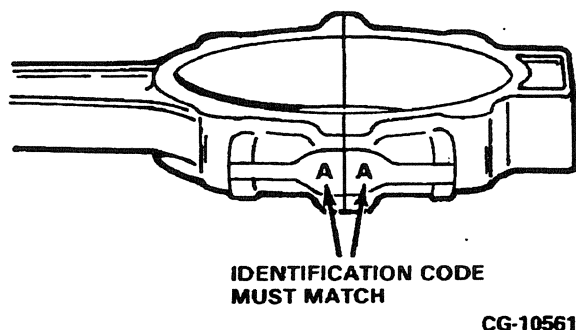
Connecting Rod Identification Code (Must be matched prior to assembly)
